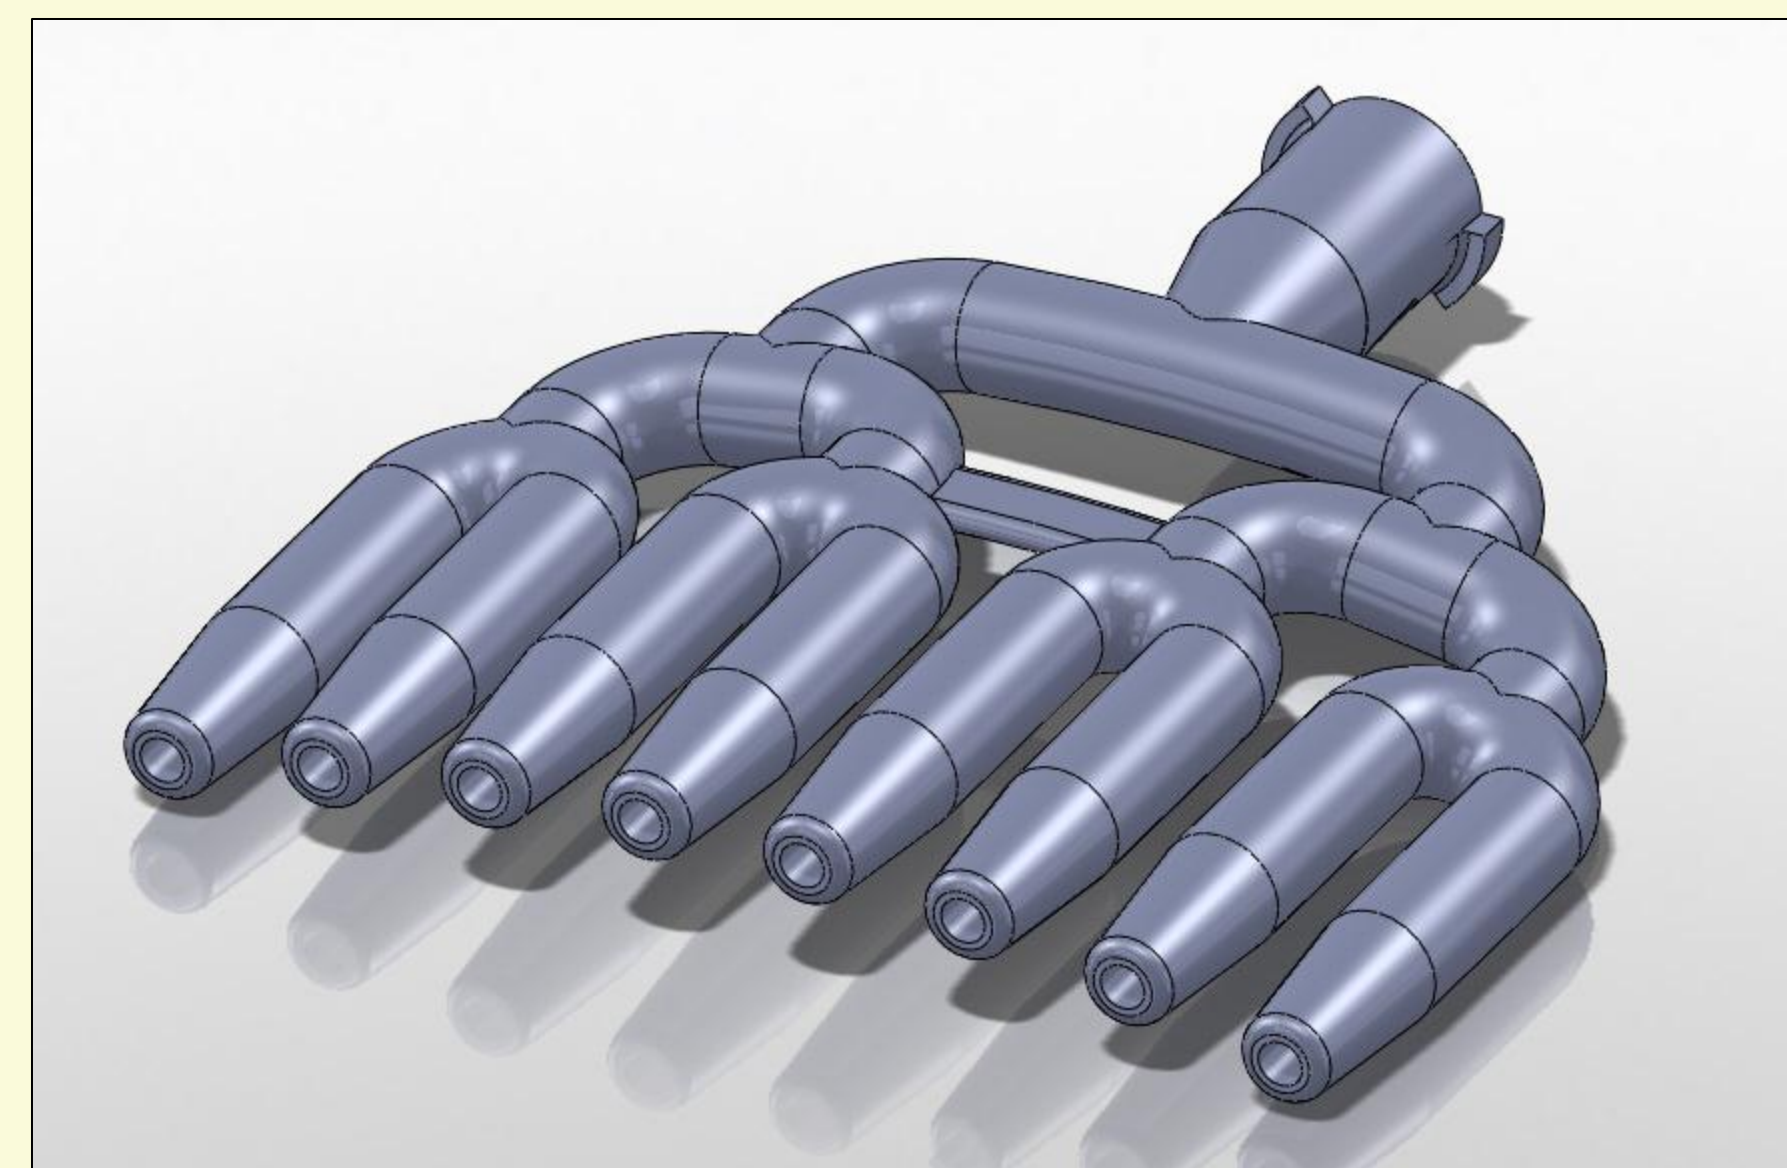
SolidWorks drawing of the final comb tip design. This drawing was used to make a rapid prototype of the part.
